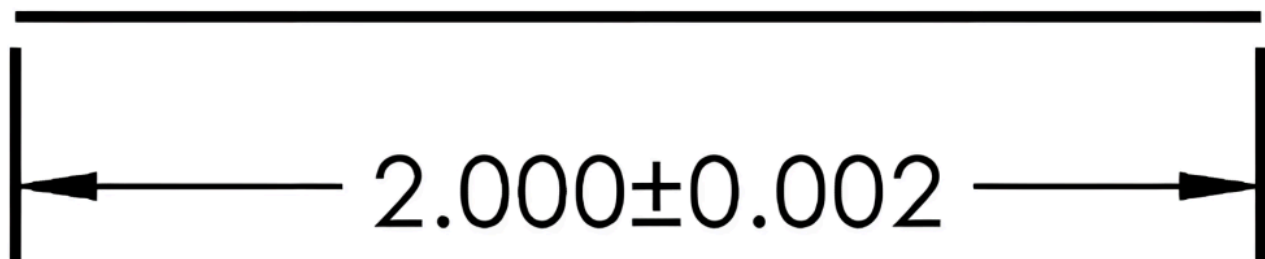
Equal bilateral tolerance – equal tolerance value in the positive and negative direction. In this example, the dimension value may range from +0.002 above the dimension size to -0.002 below the dimension size.
